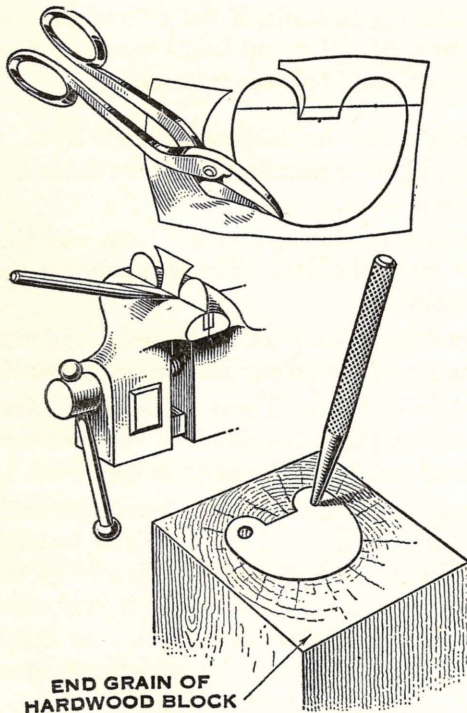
Cutting the metal to shape with tinner's snips, the cold chisel, and punch
